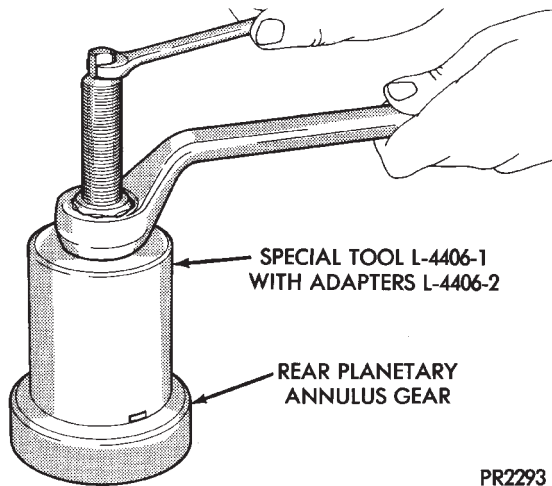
Remove Output Shaft and Rear Annulus Gear Assembly
